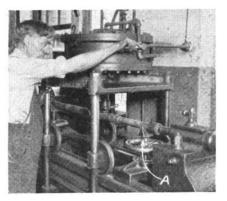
Straightening rough crankshafts for Gordon printing presses.
